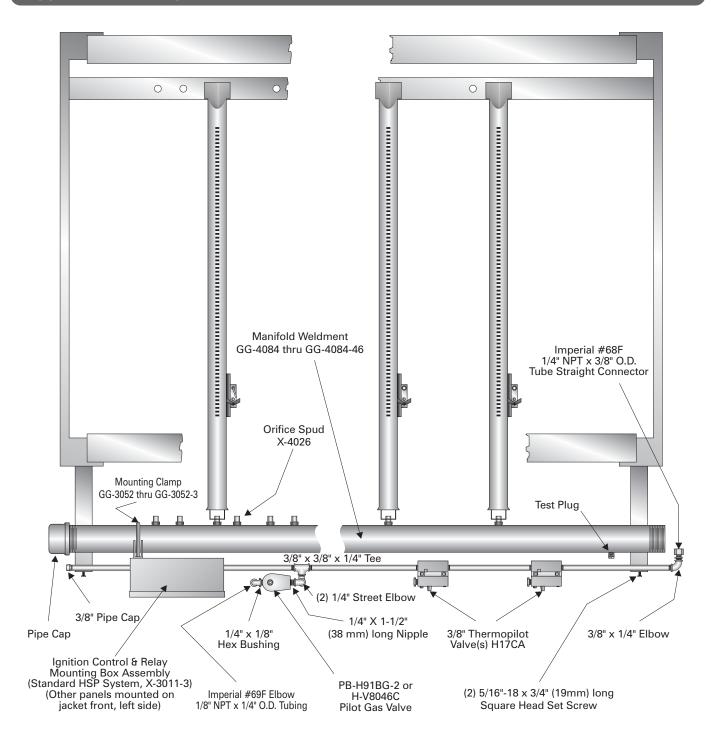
Typical Gas Manifold and Pilot Line Assembly
